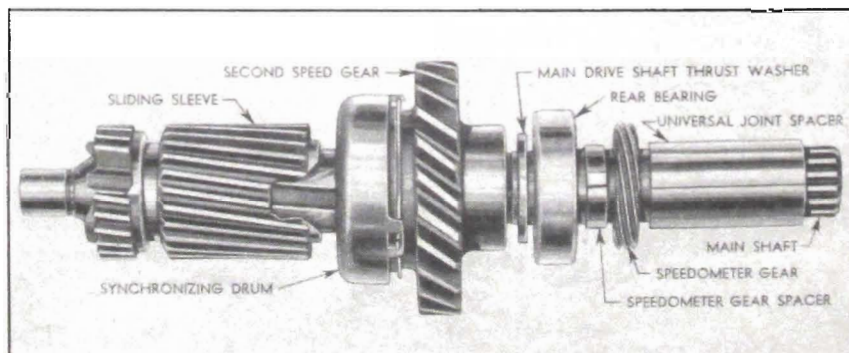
Transmission Main Shaft Assembly—Series 50
